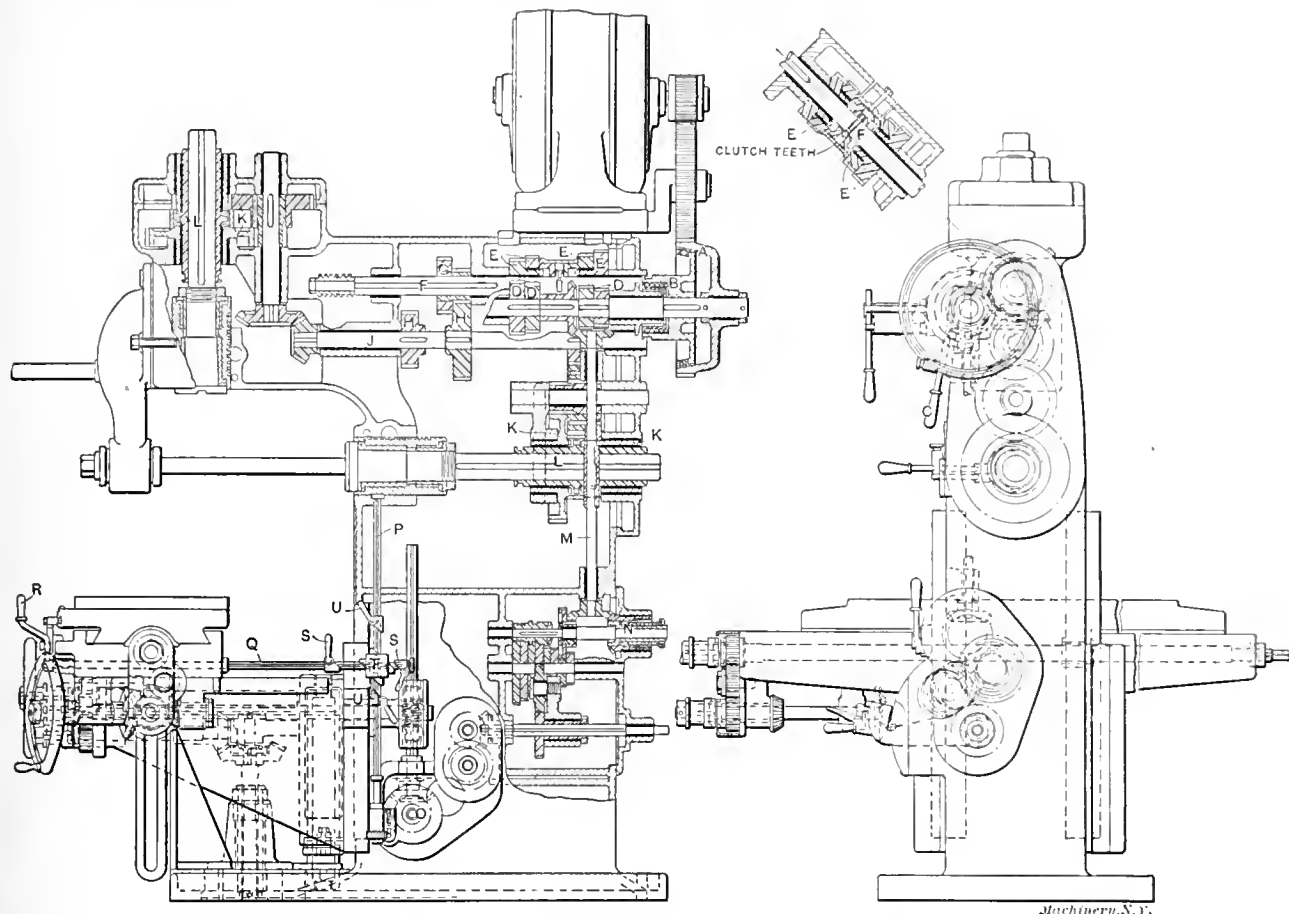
The Feed and Drive Mechanism of the No. 5 Machine
